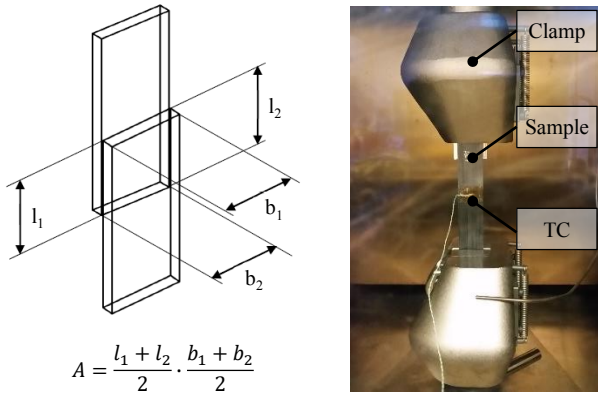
Sample joint measuring and set-up in the thermal chamber of the testing machine.
